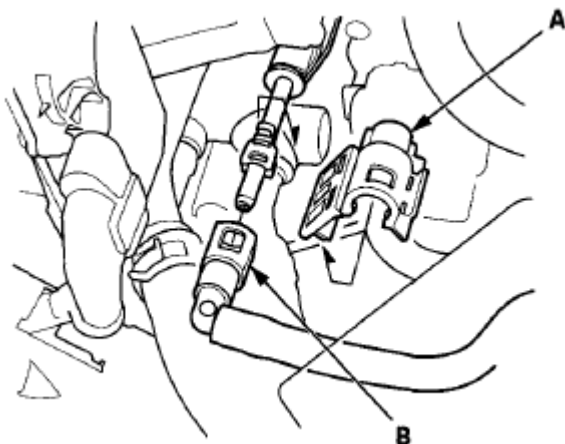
Identifying Quick Connect Fitting Cover And Fuel Feed Hose
